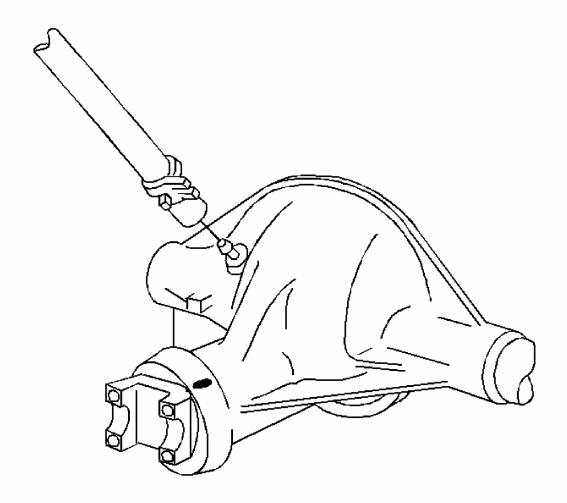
View Of Hose For Axle Vent Tube Courtesy of GENERAL MOTORS CORP.
